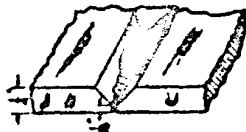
Lead joint for sheet lead over 1/4 in. thick.
